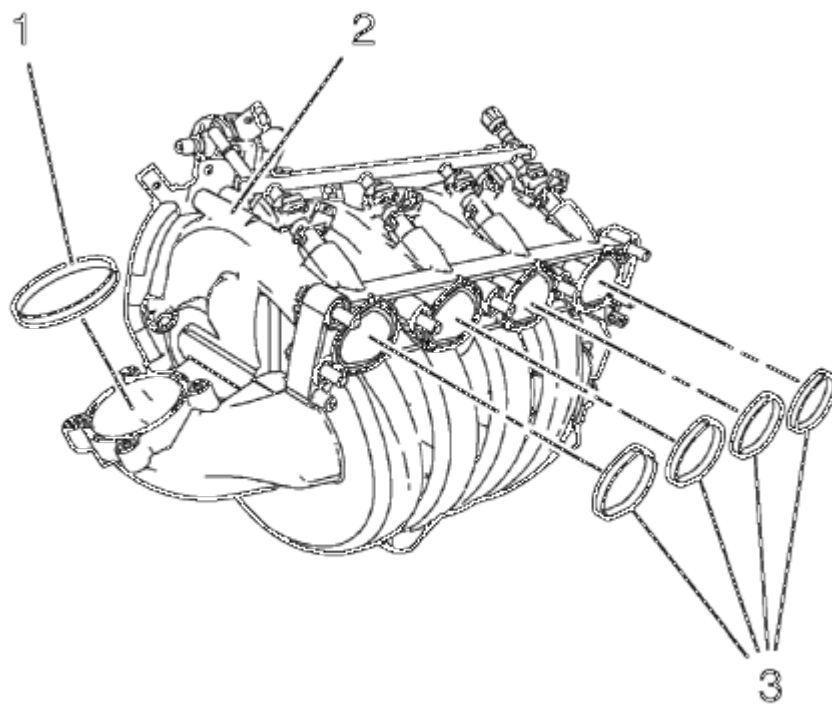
Intake Manifold, Seal And Throttle Body Seal
